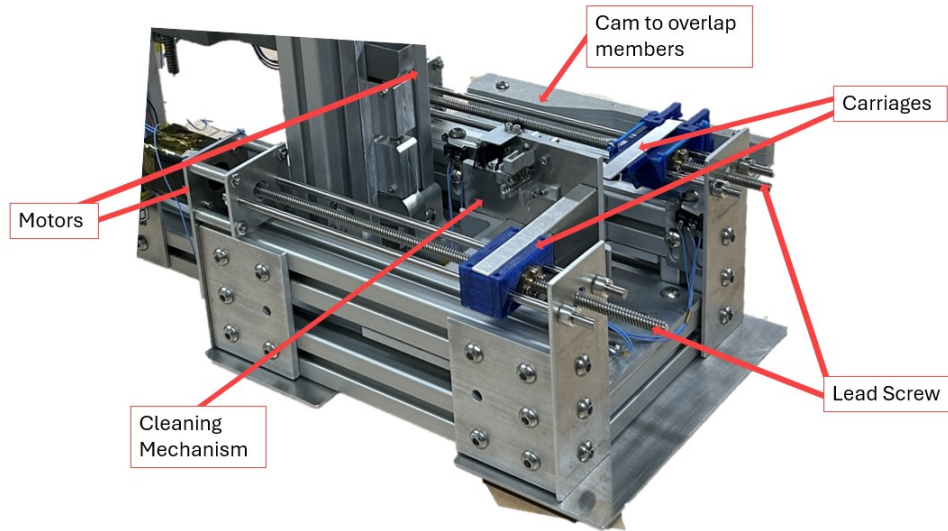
Alignment Mechanism with Cleaning Mechanism
